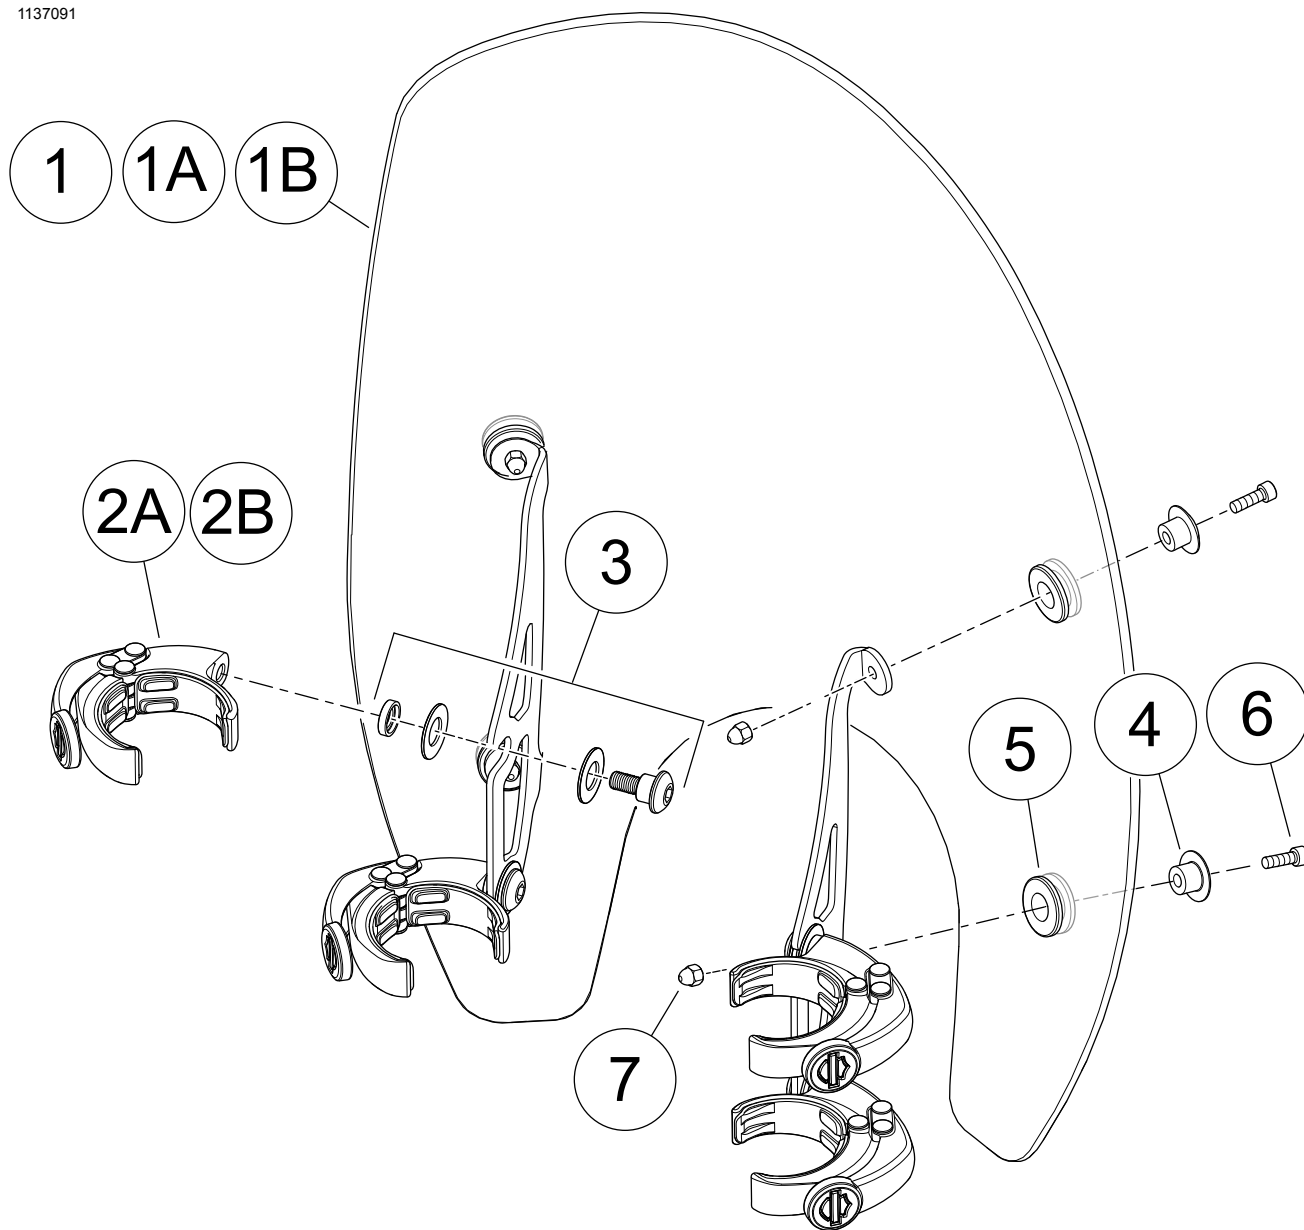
Service Parts: Super Sport Quick-Release Windshield Kit
